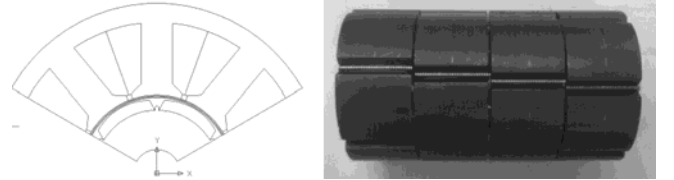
Shapes of the target motor and the rotor core with a 4 step skew
